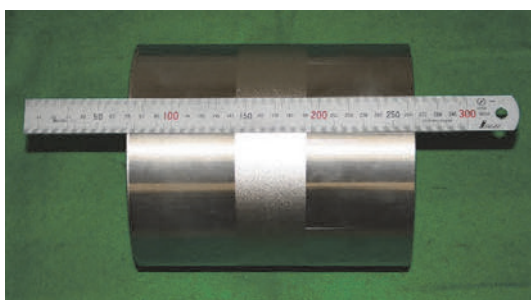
Appearance of pipe butt-welded joint after SP.
